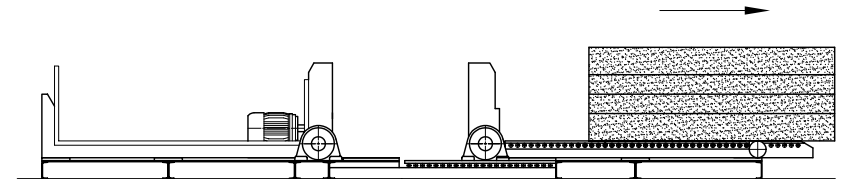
GENERAL ARRANGEMENT OF UFC JACKETING MACHINE
